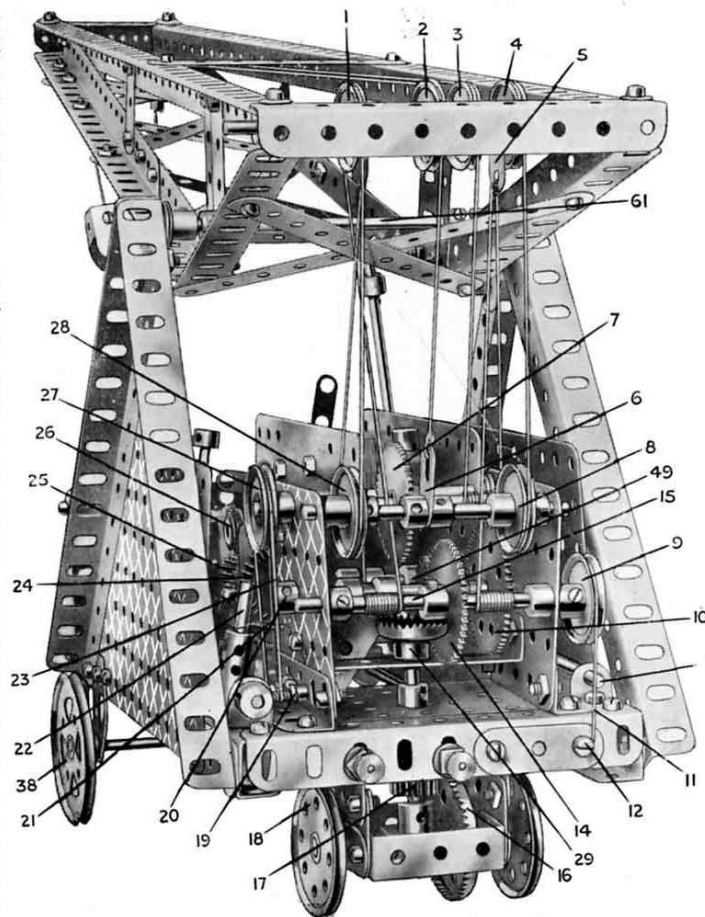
Rear view of complete crane. This illustration will be helpful when assembling the Gear-Box and luffing mechanism.
